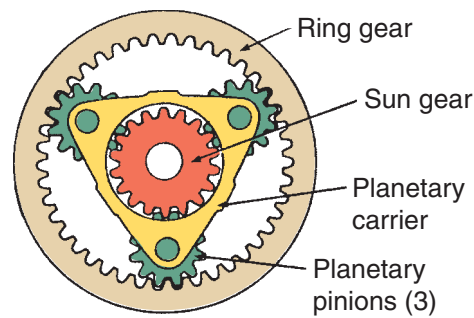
Planetary gear configuration is similar to the solar system, with the sun gear surrounded by the planetary pinion gears. The ring gear surrounds the complete gearset.
